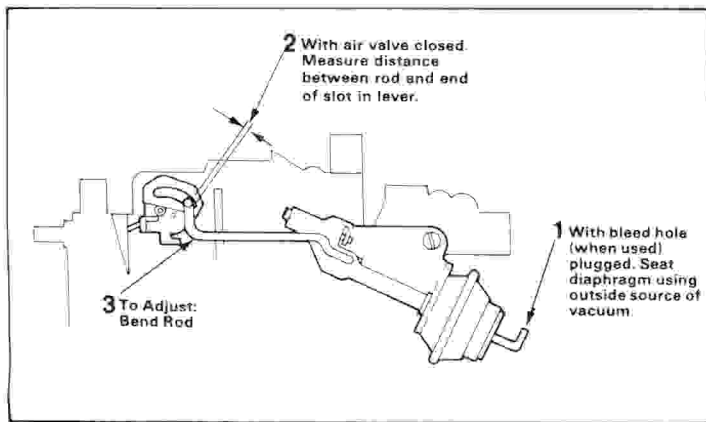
AIR VALVE ROD ADJUSTMENT
